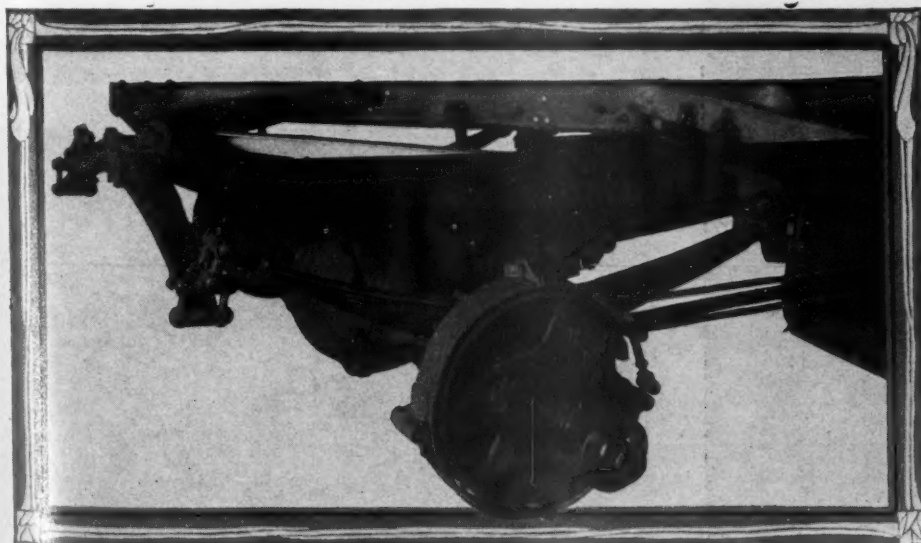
REAR AXLE AND SPRING CONSTRUCTION OF 1910 GROUT CARS
